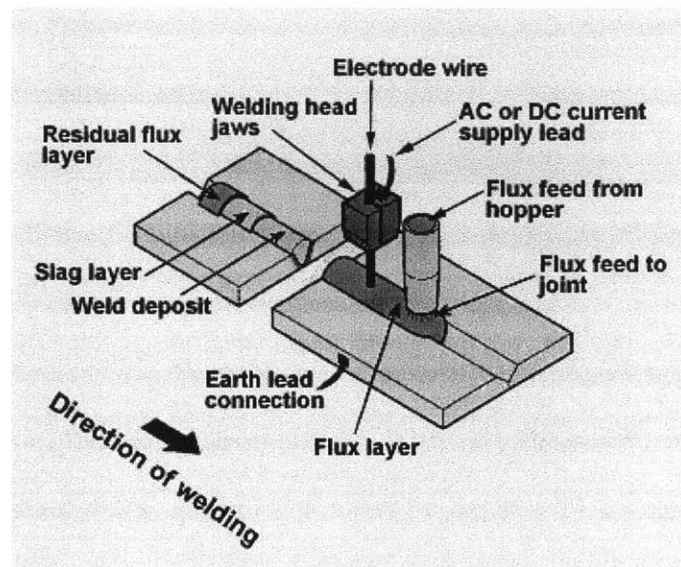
Submerged Arc welding diagram [Submerged Arc Welding, 2003]
